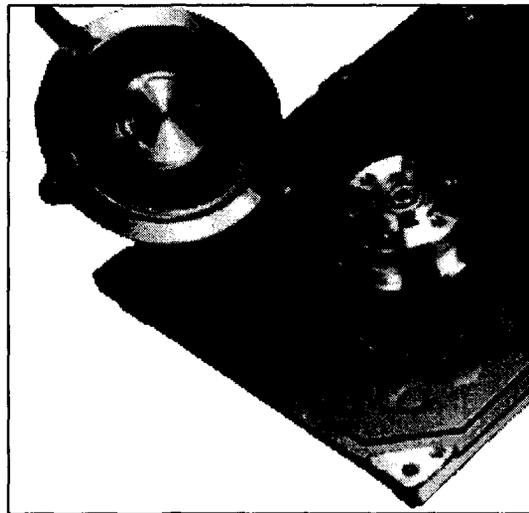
Spindle Motor Assembly (*courtesy of Nidec*)
